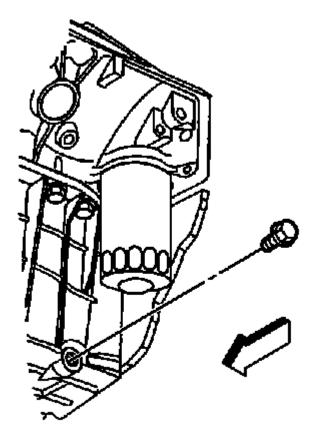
Identifying Oil Drain Plug Courtesy of GENERAL MOTORS CORP.
